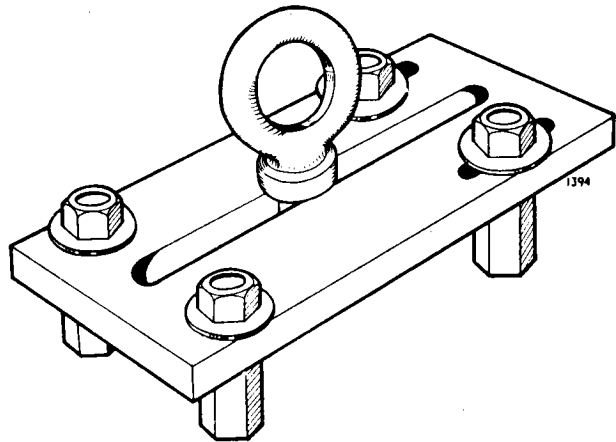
The engine lifting plate (Churchill Tool No. J.8.). On later cars, engine lifting straps are fitted to the cylinder head.
